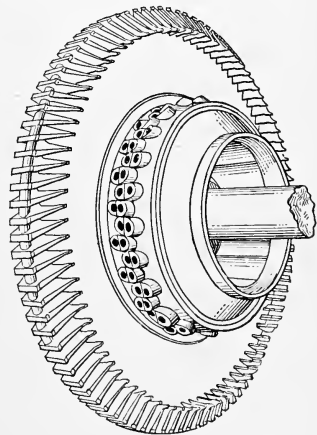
Impeller for Rees "Roturbo" Jet-condenser Pump.
